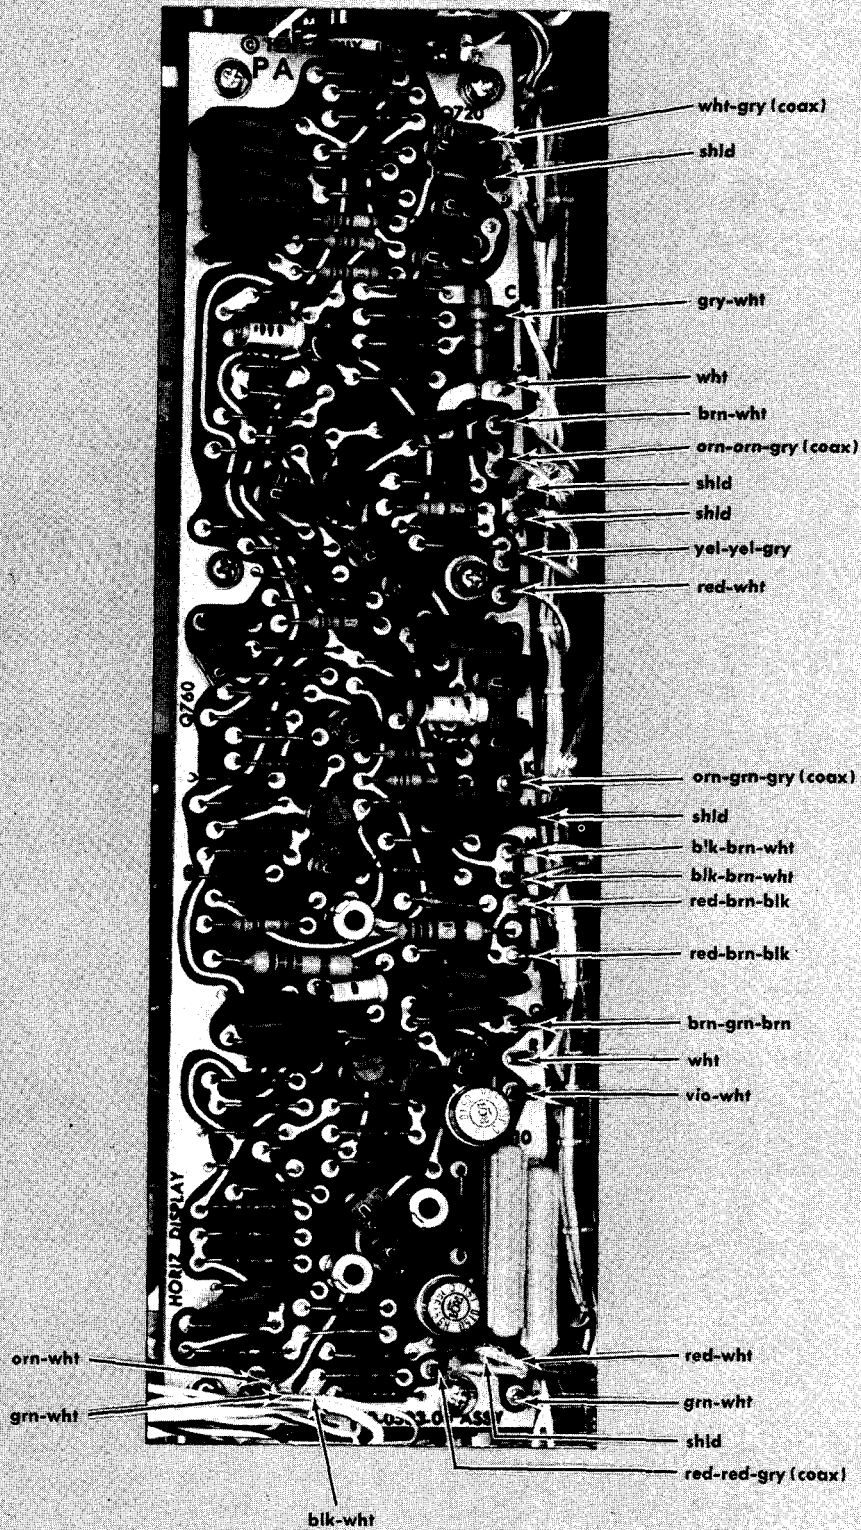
Horizontal Display circuit board assembly showing color code to pin connectors.
